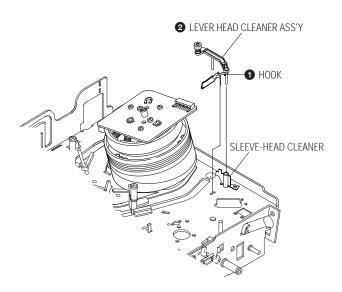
Lever Head Cleaner Ass'y Removal
